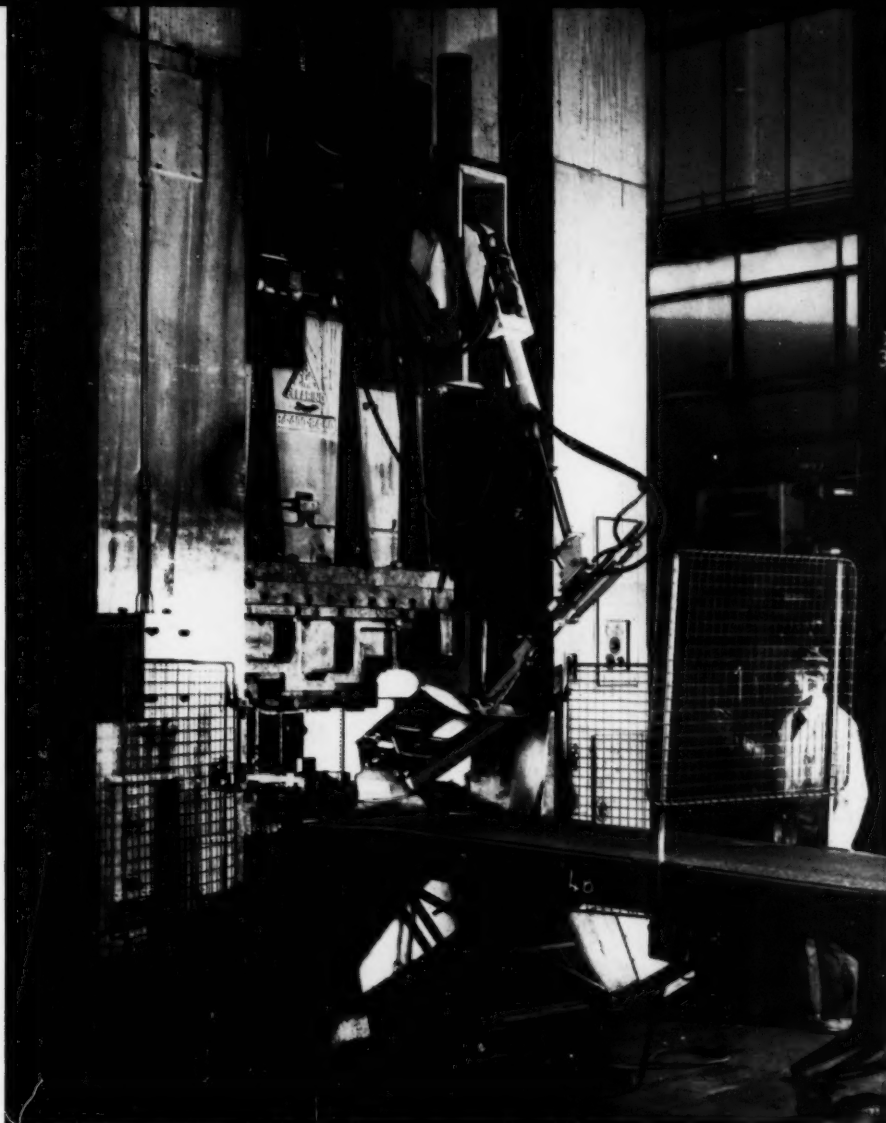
Automatic Jaw-Type Extractor. This photograph shows an inner door panel being removed from the press by an automatic, pneumatically controlled jaw-type extractor and then placed on an inter-press conveyor. The jaw, which moves forward and grips the pressing, is controlled by a Maxam air cylinder
